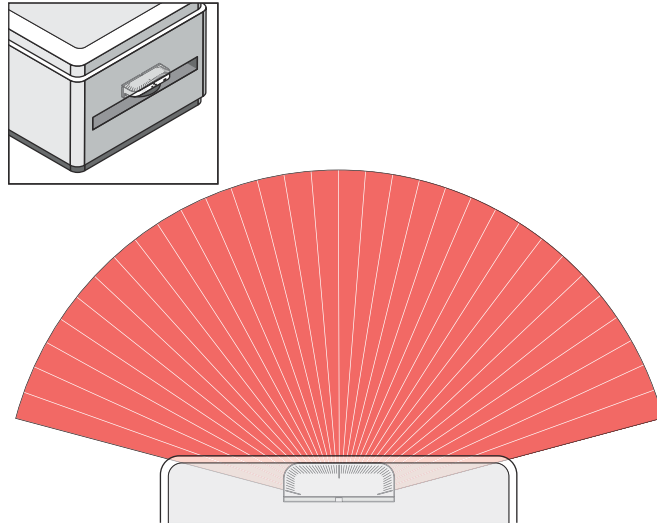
Example remedy: Install the safe multibeam scanner in the machine paneling
